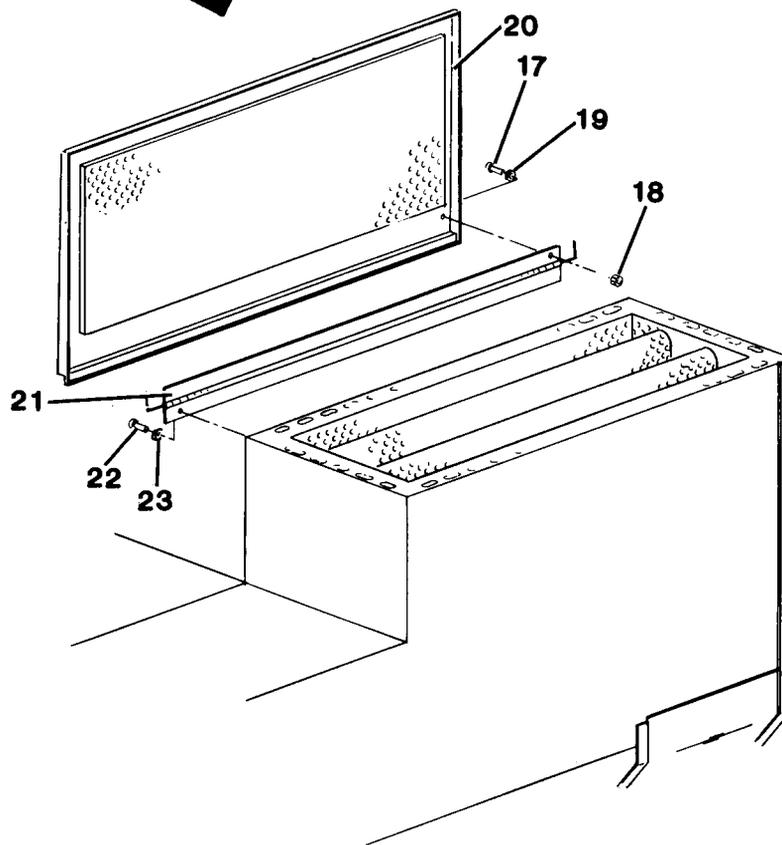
Access Door Replacement (Sheet 2 of 3)
